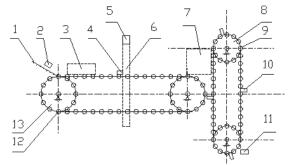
Automatic postal parcel turning machine experimental system mechanism 1.feed chute 2.start switch K0 3.send out mechanism 4.position detection phototransistor T1
